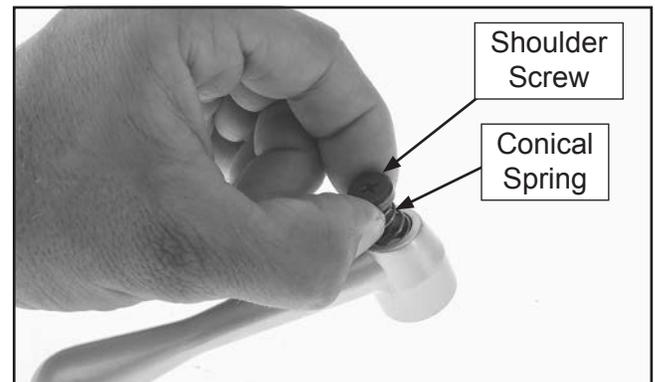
Installing shoulder bolt and conical washer into lock handle.
